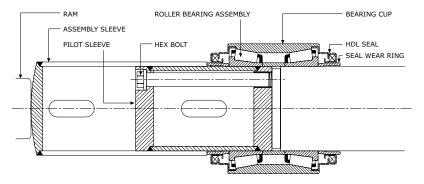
Separate Sleeve method of applying roller bearings to an axle.
